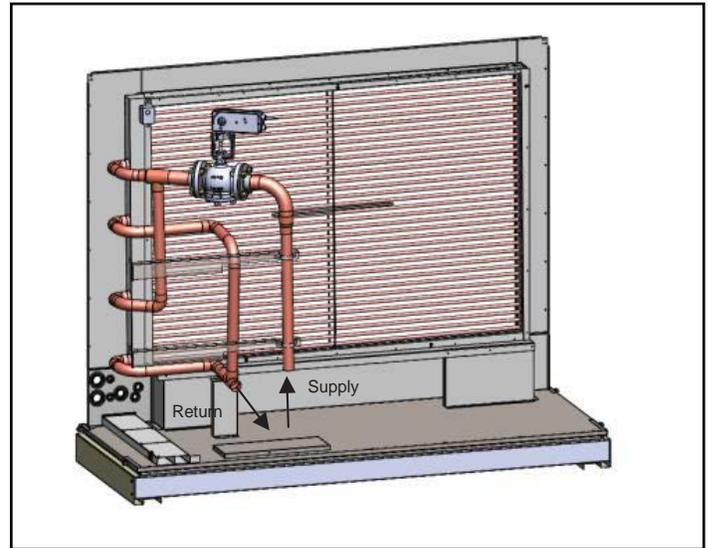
B-Cabinet Steam Heat Section (Valve and Factory Piping)
